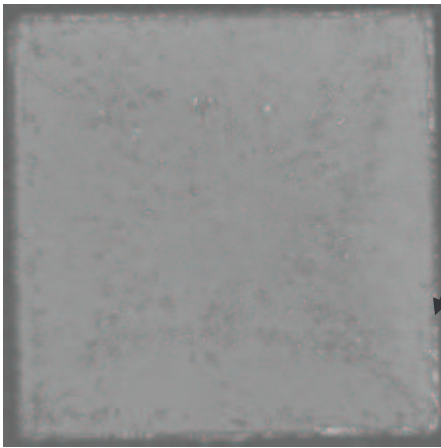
C-SAM for assembly with Si (Ti/Ni/Au) after 2X reflows.
